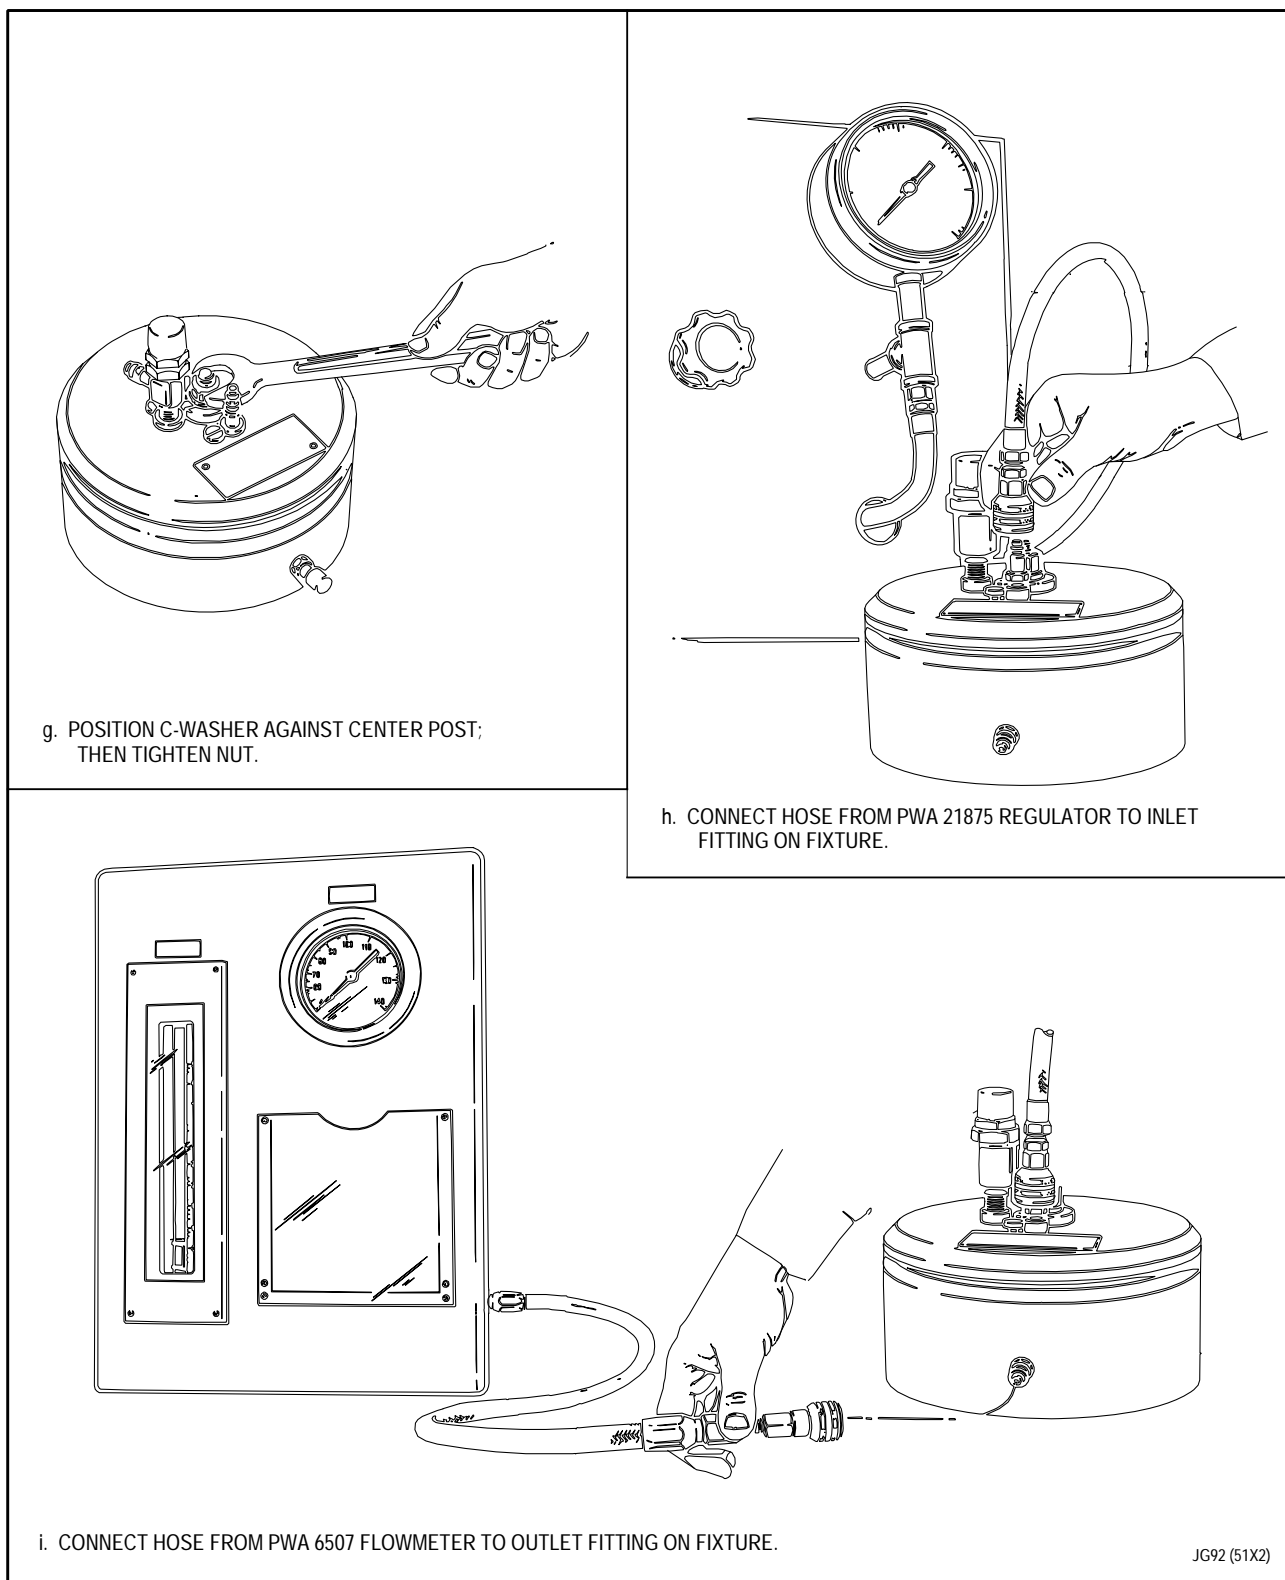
No. 2 and 3 Bearing Seal Assembly - Air Leak Check
